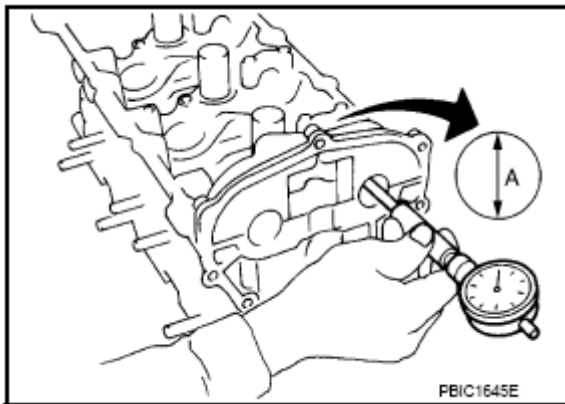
Measuring Inner Diameter Of Camshaft Bracket Using Bore Gauge
